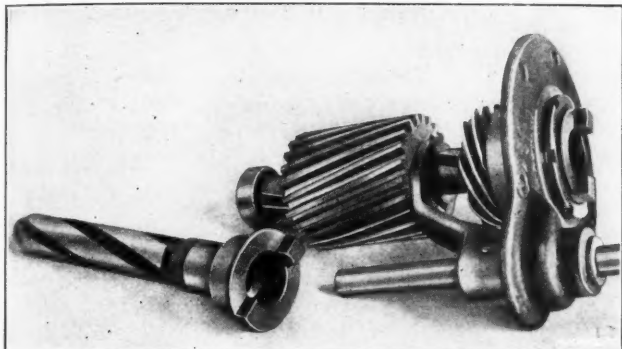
Spark-advance Shaft having Helical Grooves which are cut by Hobbing—Shaft assembled with Shifting Fork and Timer Gear
